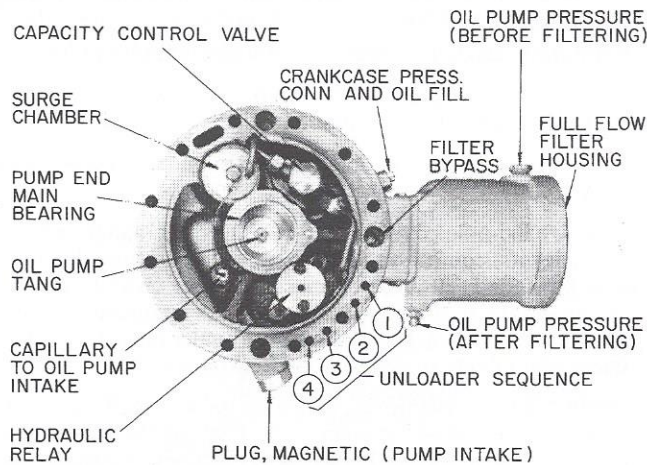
Compressor Hand-Hole Cover and Assembly (5F40 and 5F60)
